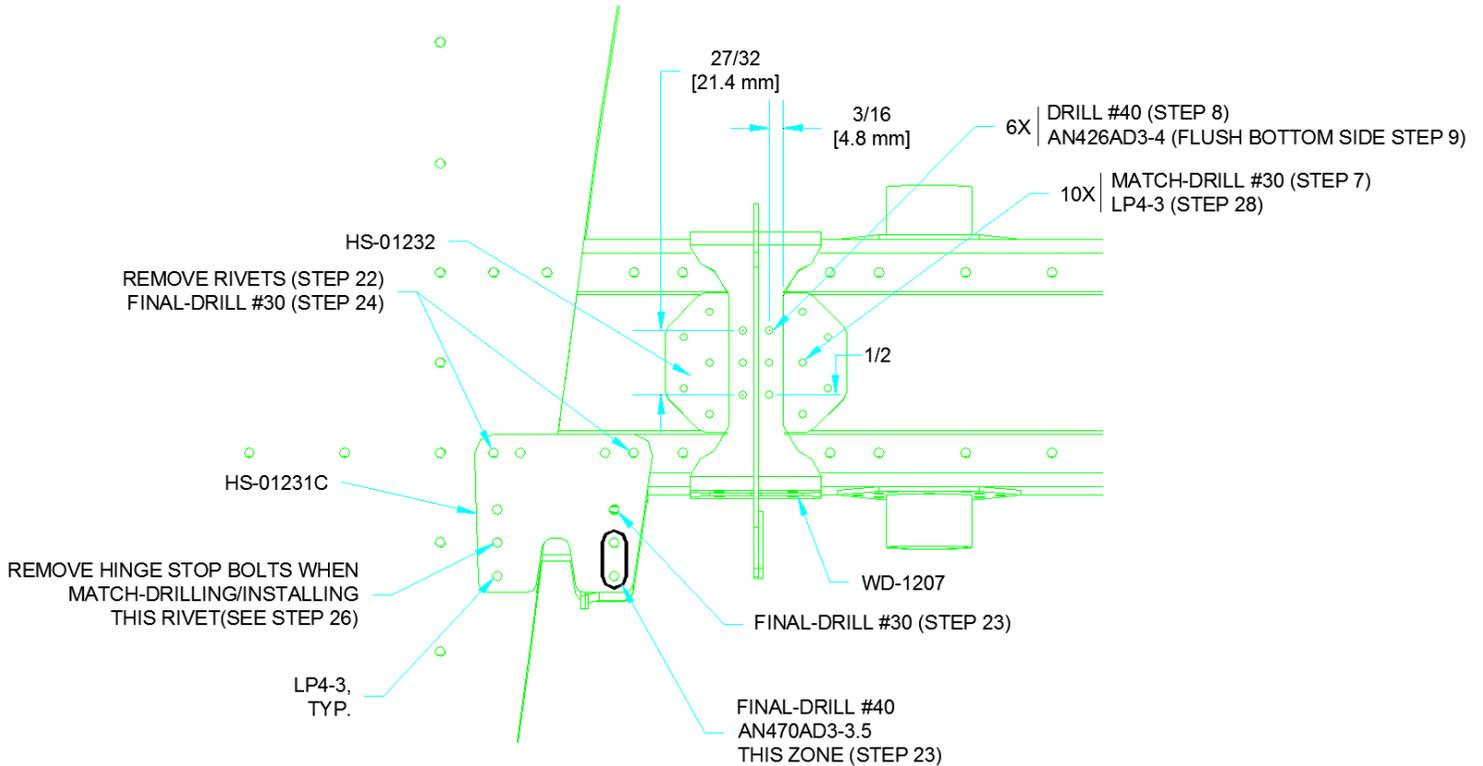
INSTALLING THE STABILATOR HINGE GUSSETS
